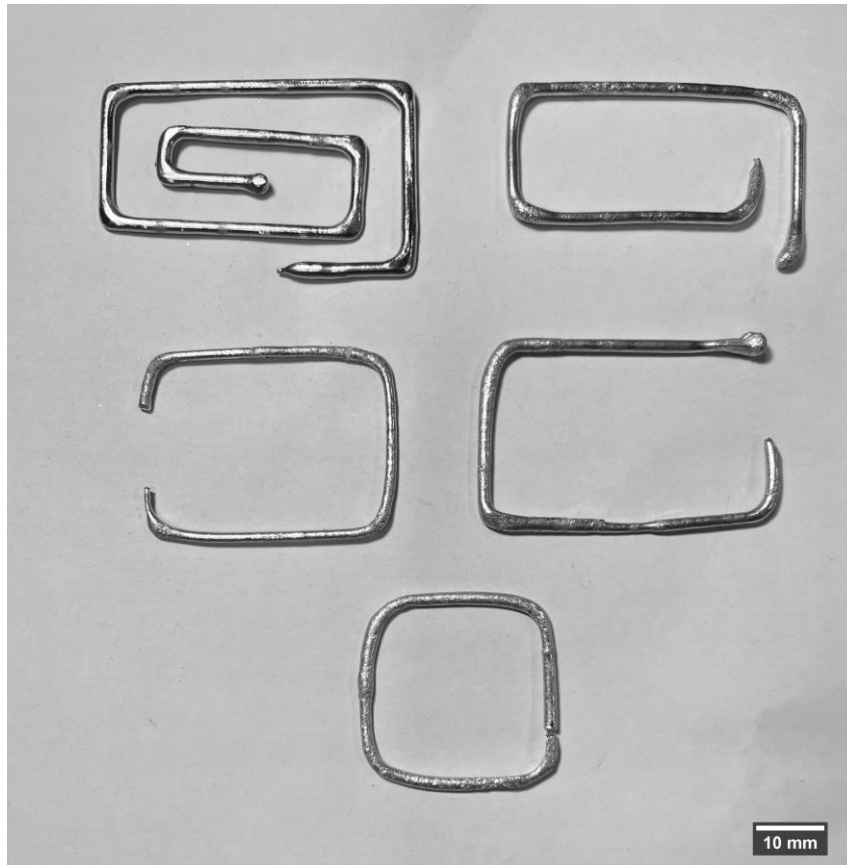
Examples of printed layer by the extrusion and deposition system of semi-solid alloy.
